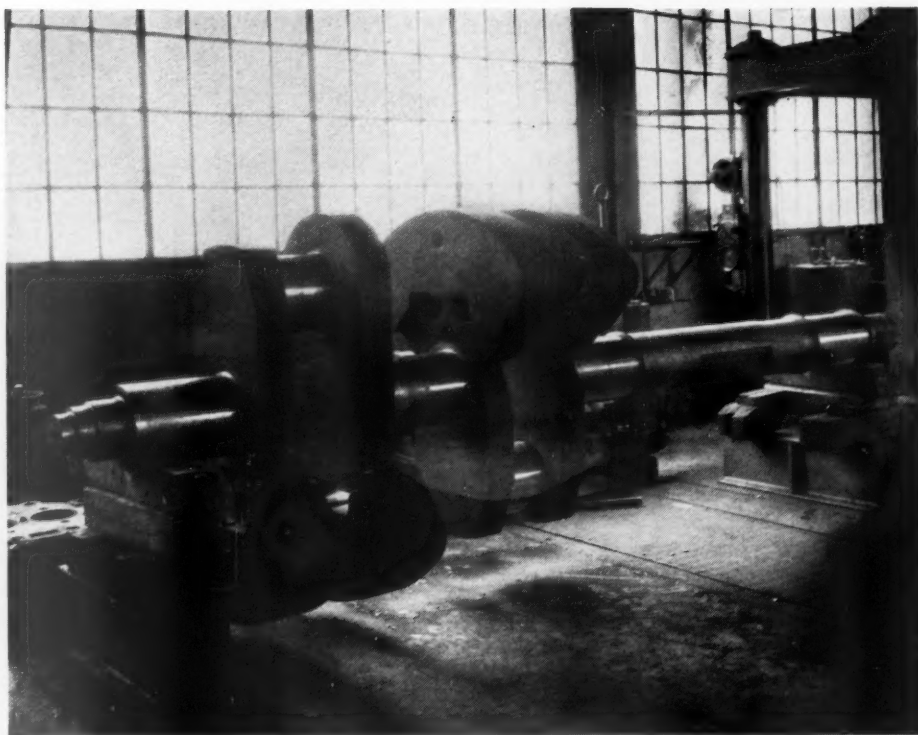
Replacing fractured throw of a shaft is done with the aid of electric arc welding
